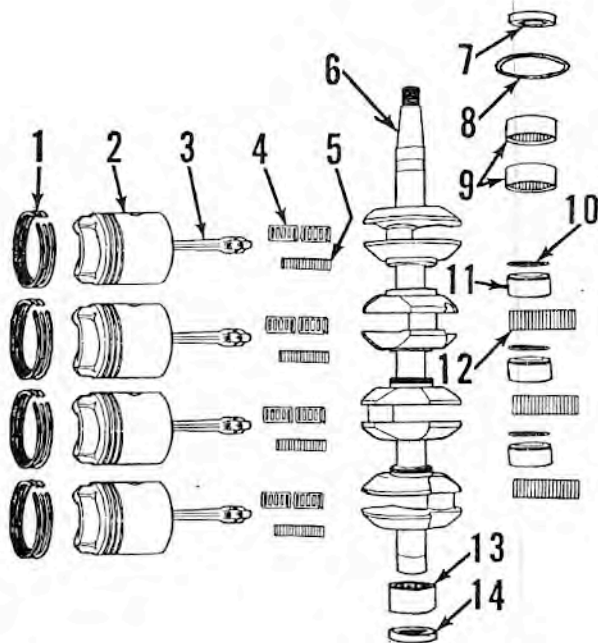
Crankshaft, pistons and associated parts used on Tiger Shark.
